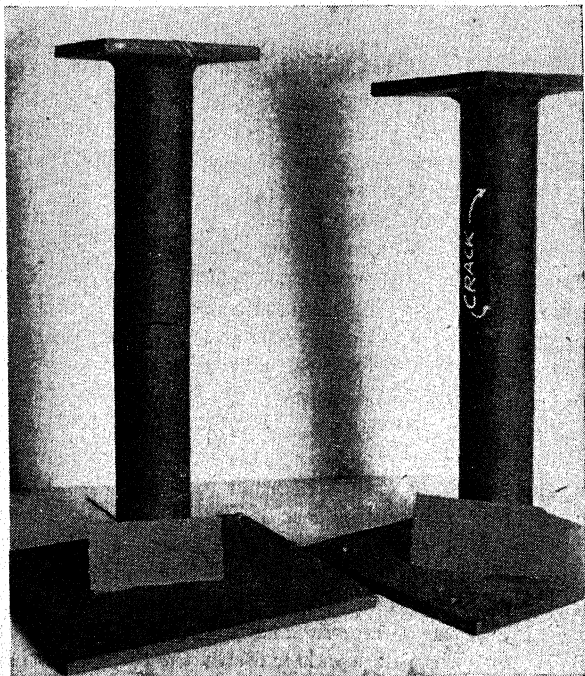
Result of repeated shear test. Left—sample made by former welding method failed at weld. Right—arc welded sample developed longitudinal crack in the parent metal.
